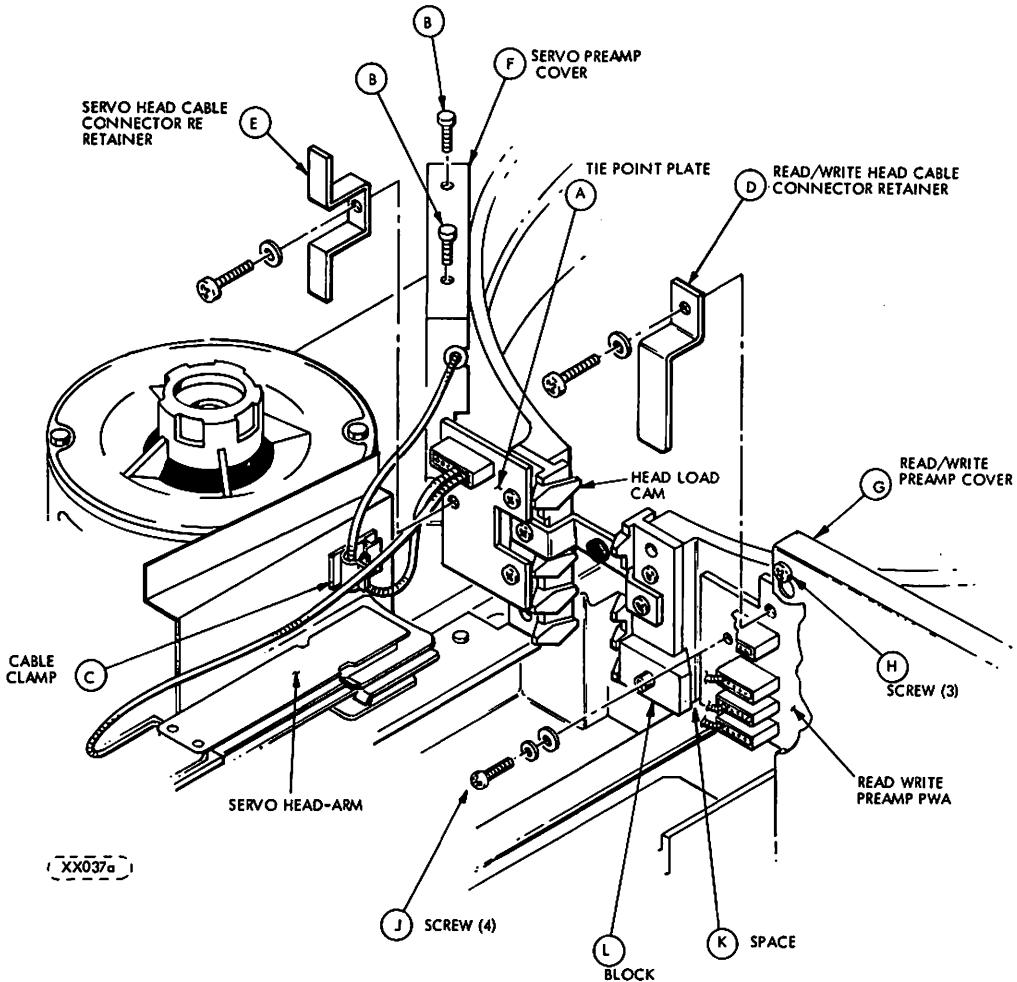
SERVO HEAD/ARM ASSEMBLY
